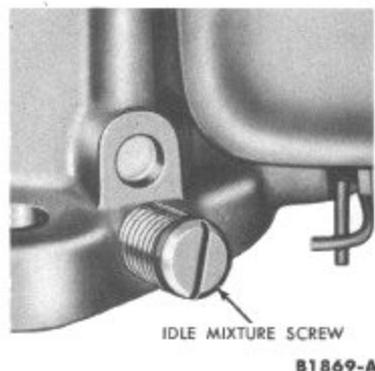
Ford Single-Barrel Idle Fuel Mixture Adjustment
